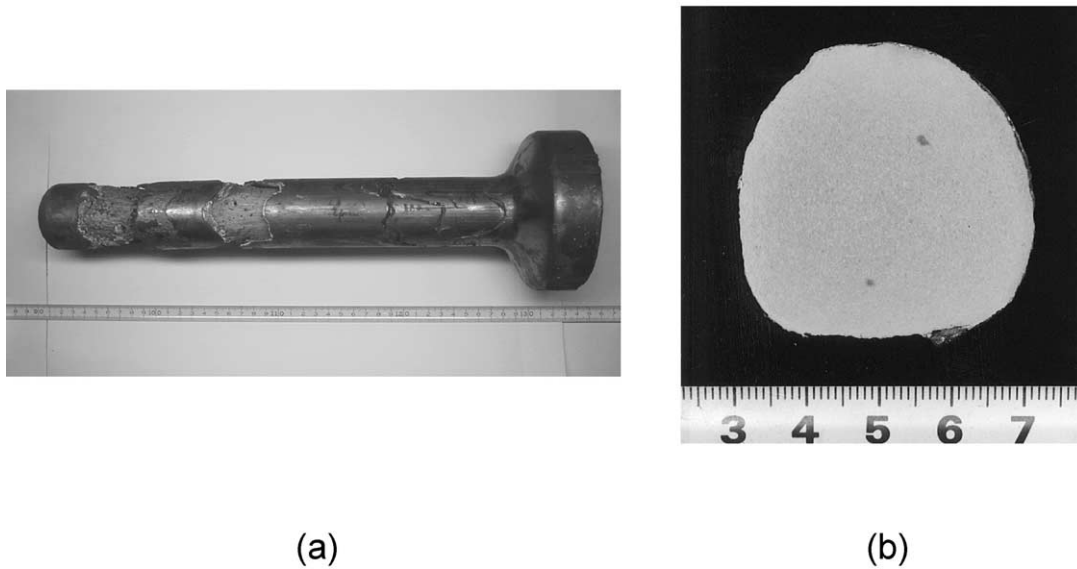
Hot extruded Ti-42Al-10V, (a) external appearance, (b) cross-sectional macrostructure.
